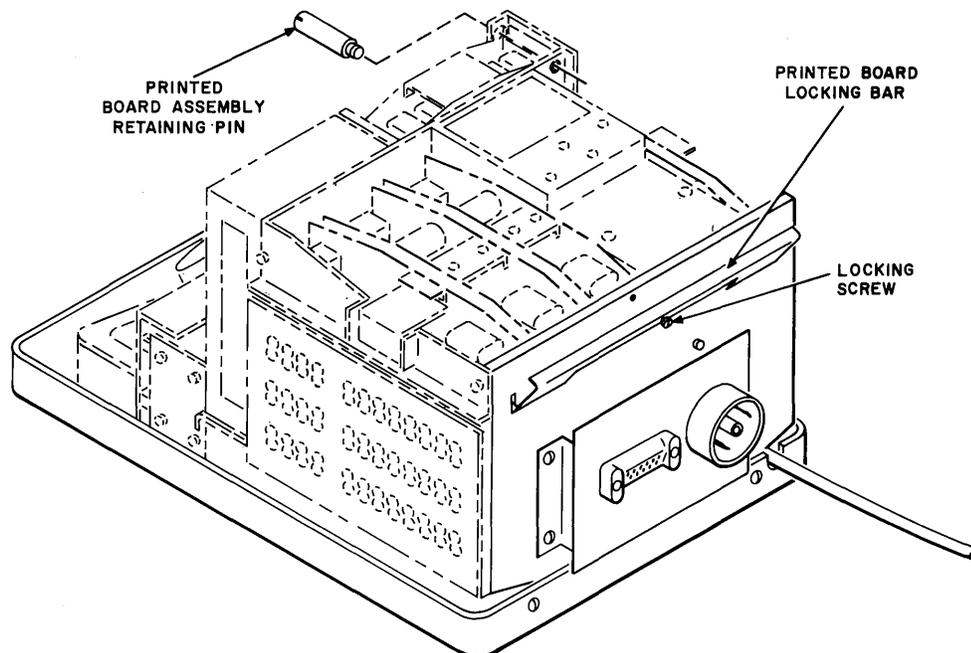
Printed Board Assembly—Angle Retaining Bracket
